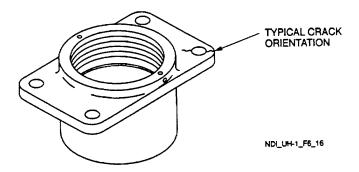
Hydraulic Servo Cylinder Assembly (Collective Control) Bearing Housing.
